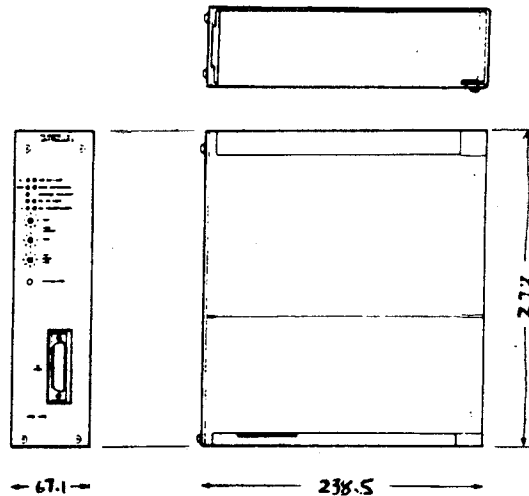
Outline Dimensions (Remote I/O Controller)
